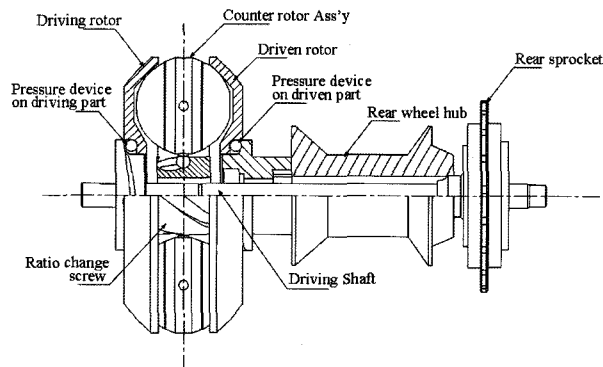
A Section view of the ISCVT assembled into the rear wheel hub.
